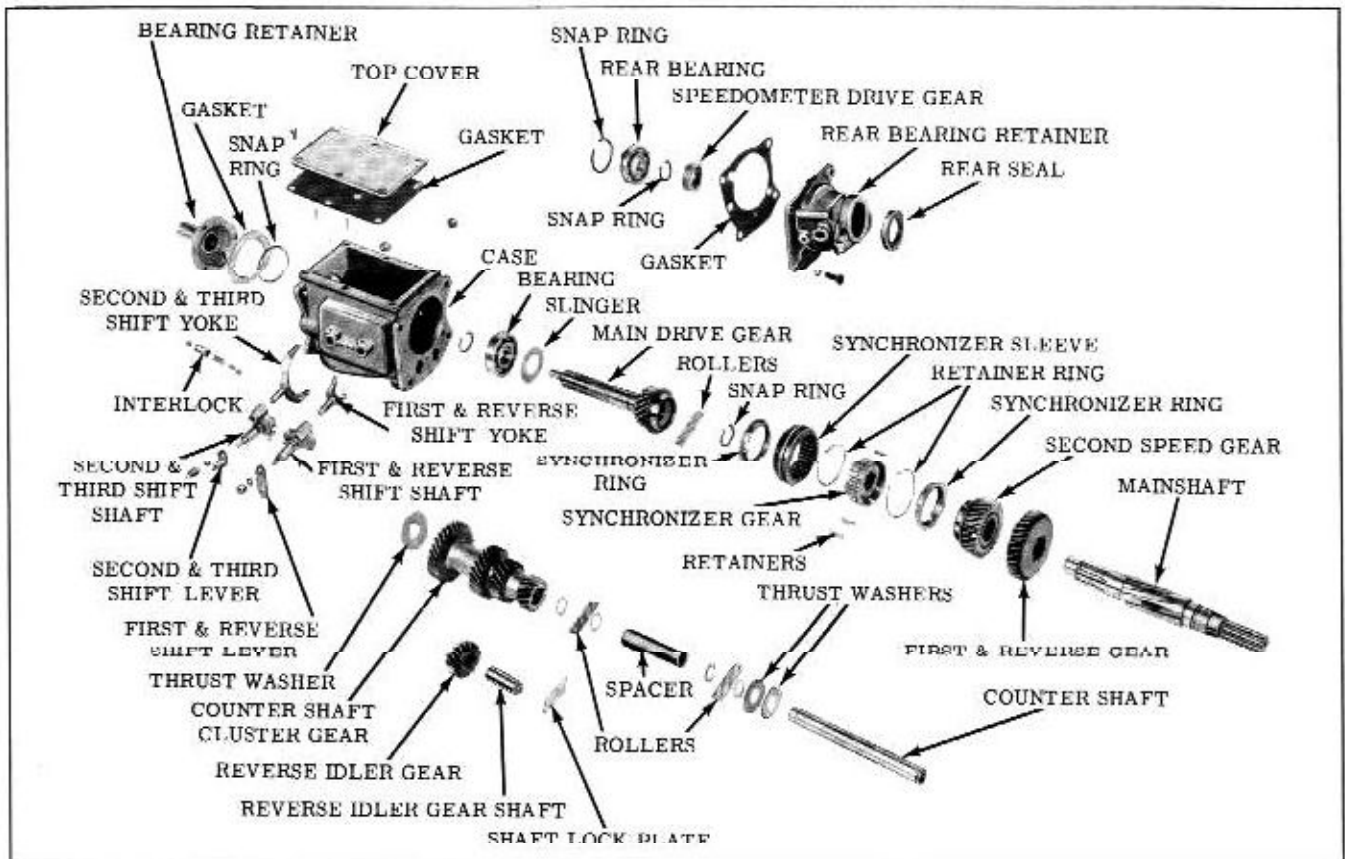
Syncro-Mesh Transmission - Exploded View
